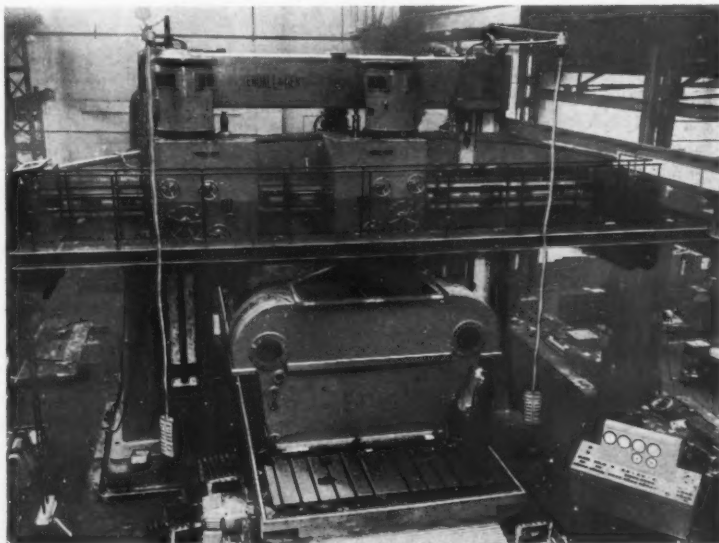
Kendall & Gent 29½ by 12 by 8½ ft. Plano-milling Machine
